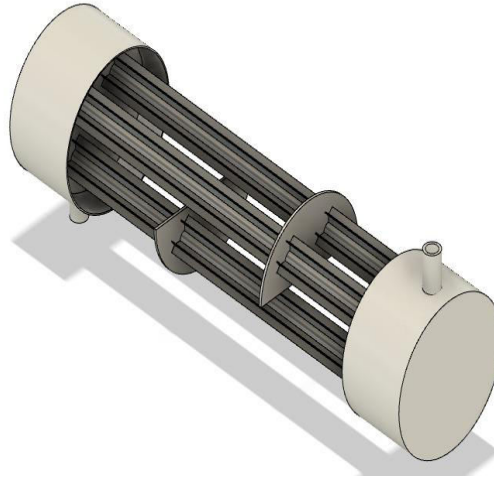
3D view of shell and tube with 4 Y shaped fins.
